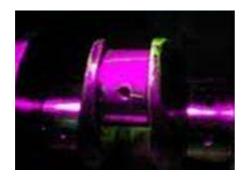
Crankshaft Crack Detection Testing
